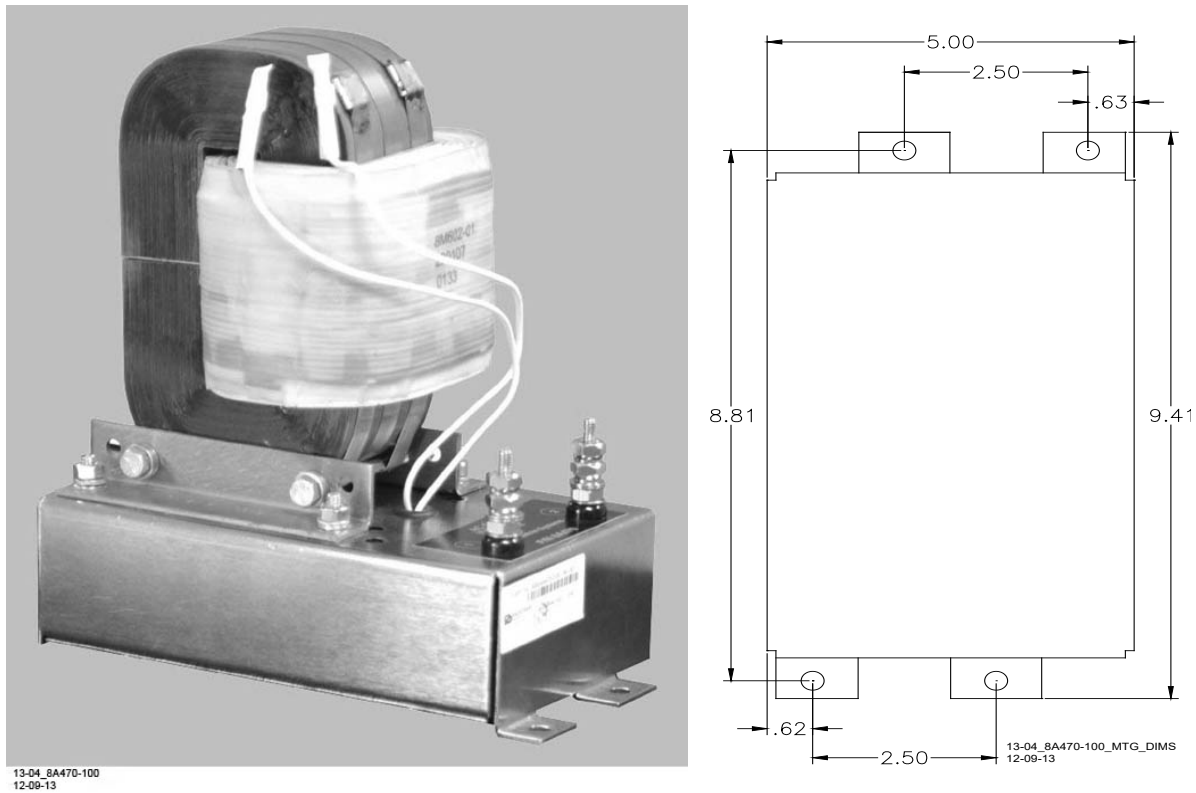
AC Code Unit, 8A470-100 with Mounting Dimensions
